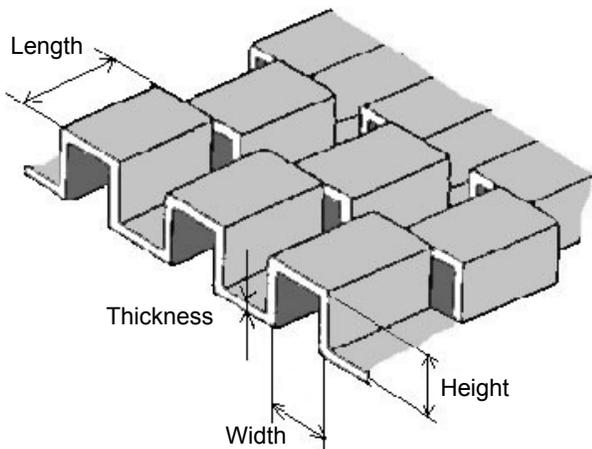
Cross Section of Main Heat Exchanging Zone
